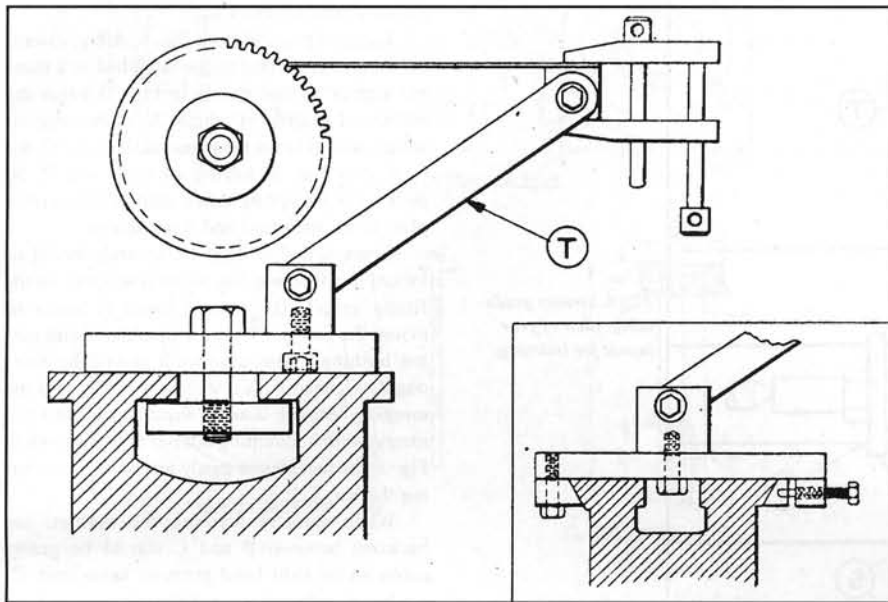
Method of mounting the index strip. Inset, fixing for V-bed lathe.
